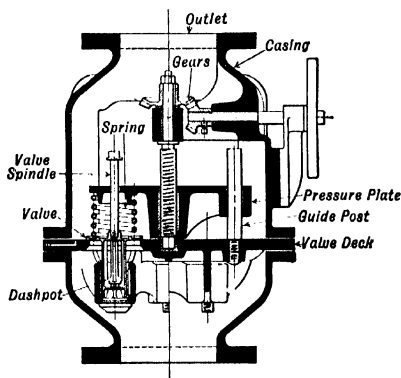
Cochrane Multiport Back Pressure Valve.
